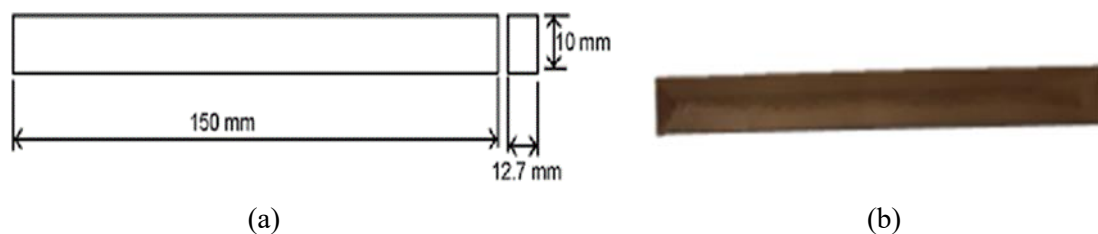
(a) Specimen geometry and dimension according to ASTM D790 standard (b) A sample of printed bending specimen
